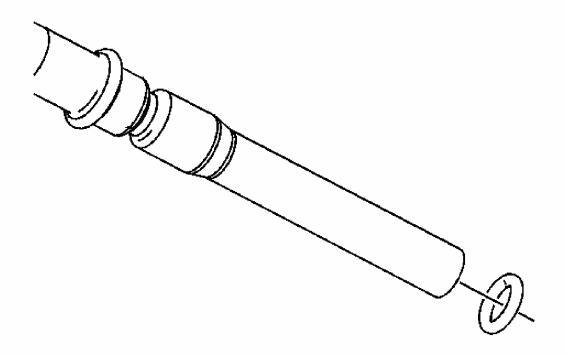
Removing & Installing Oil Level Indicator Tube & O-Ring Courtesy of GENERAL MOTORS CORP.
